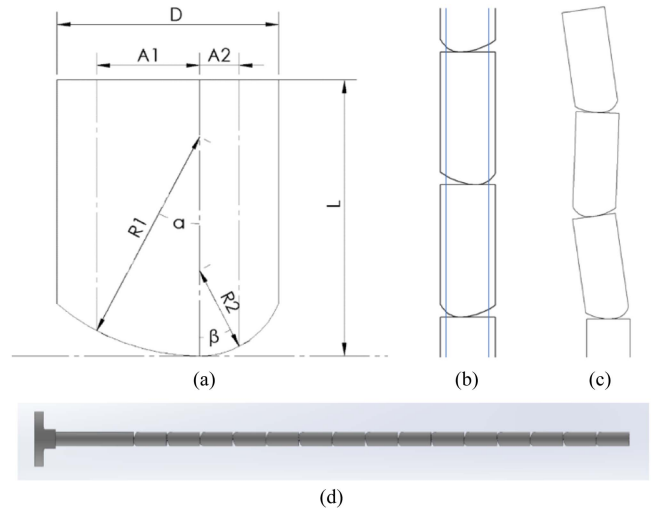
Asymmetric joint design: (a) Side view of an individual link with geometrical parameters; (b) link sequence; (c) section buckling; (d) side view of the upgraded design.
